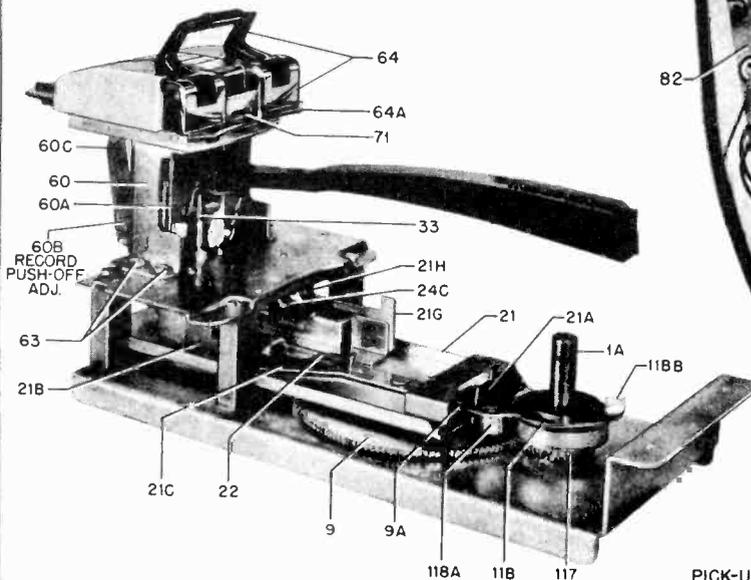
VIEW OF RECORD CHANGER WITH BASE & MOTOR ASSEMBLY REMOVED
